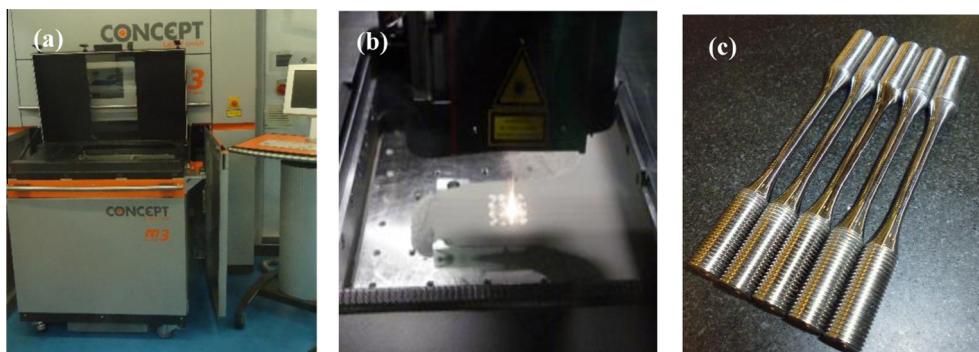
SLM manufacture process: (a) Machine; (b) Melting process; (c) Sintered and polished samples.
